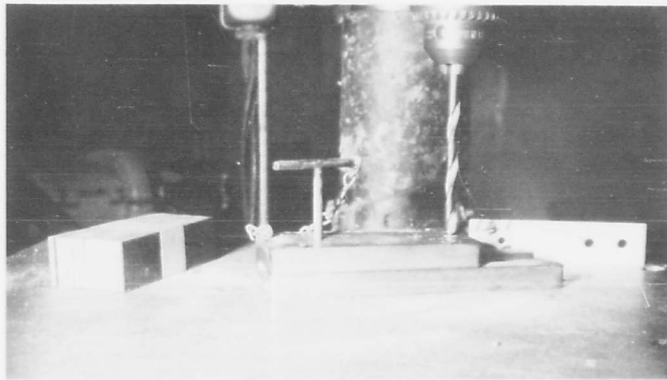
Reaming Holes in Bearing Strength Test Specimen
